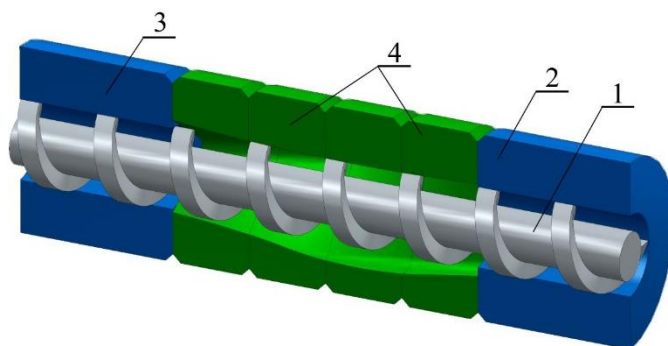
Longitudinal section of the plasticizing system with a classic screw equipped with four rotational barrel elements: 1 – screw, 2 and 3 – immovable barrel parts, 4 – rotational barrel elements with a torsional hole in the shape of a triangle
